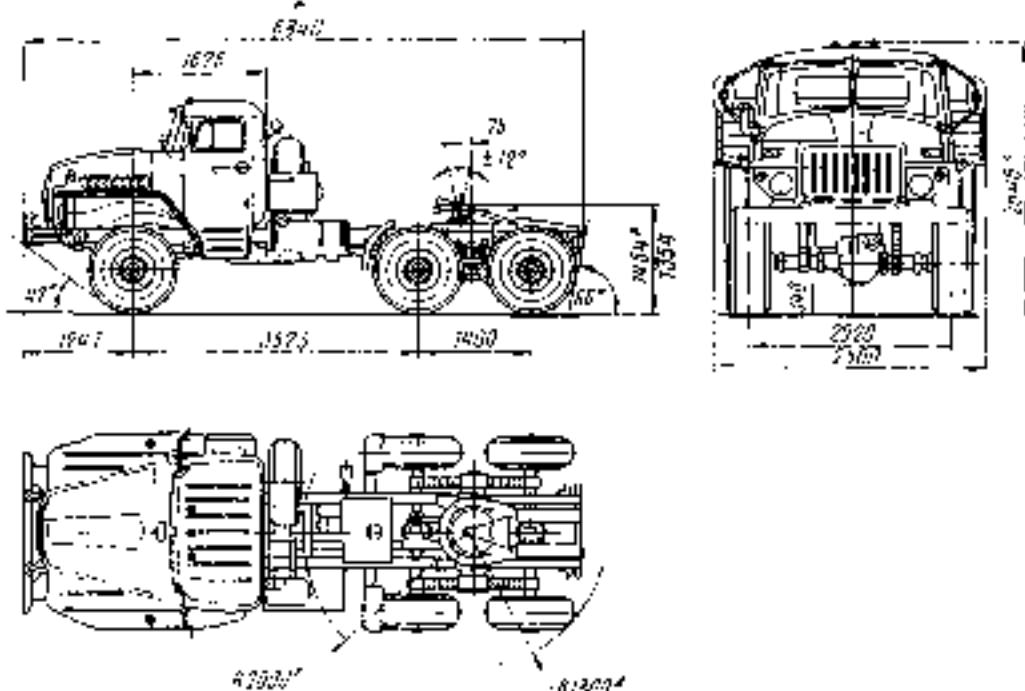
Overall Dimensions of Ural-44202-02 Bolster Truck
